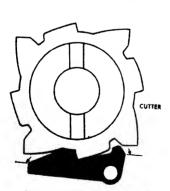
The cutter has four contours and can be used in any of the cutting surfaces.
